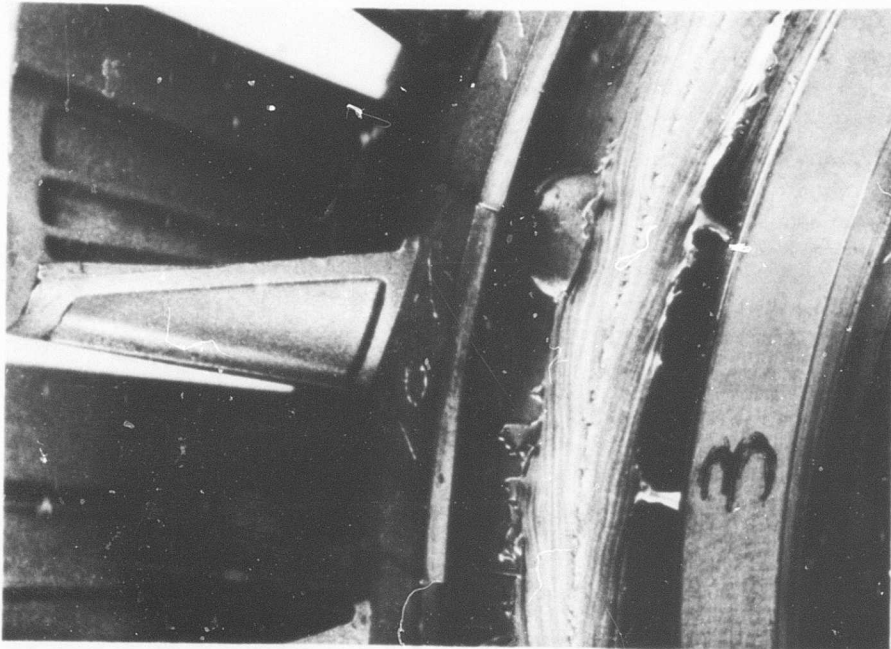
(b). Turbine Rotor Blade-To-Disc Weld Fixture - Revised.
